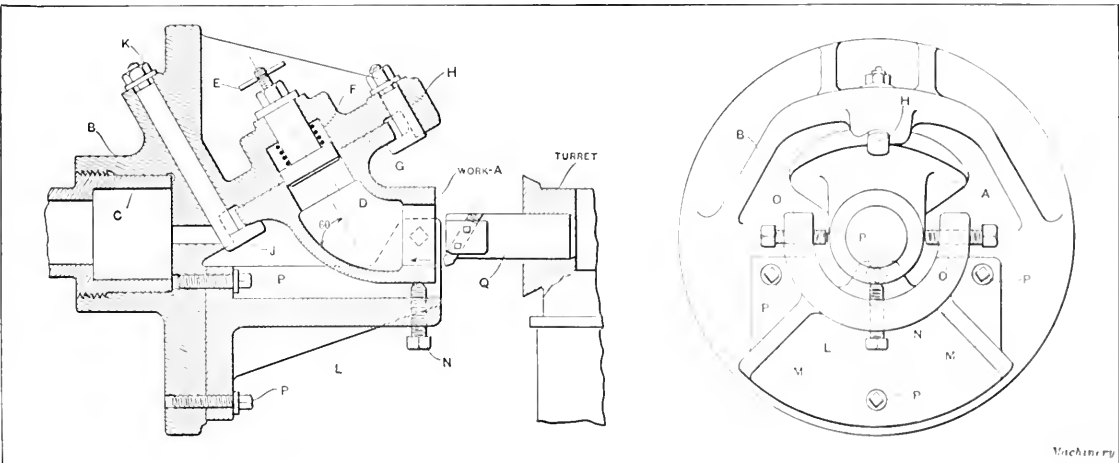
Fixture for machining Angular Cast-iron Fitting
